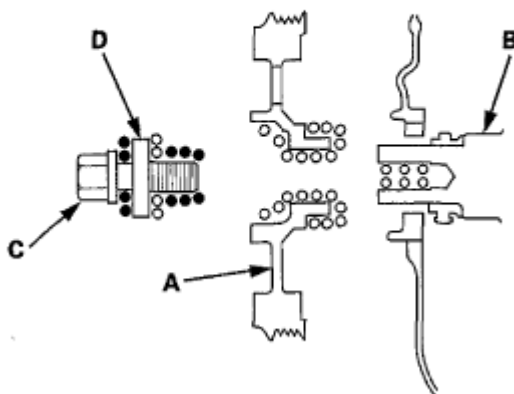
Cleaning Crankshaft Pulley, Crankshaft, Bolt And Washer
